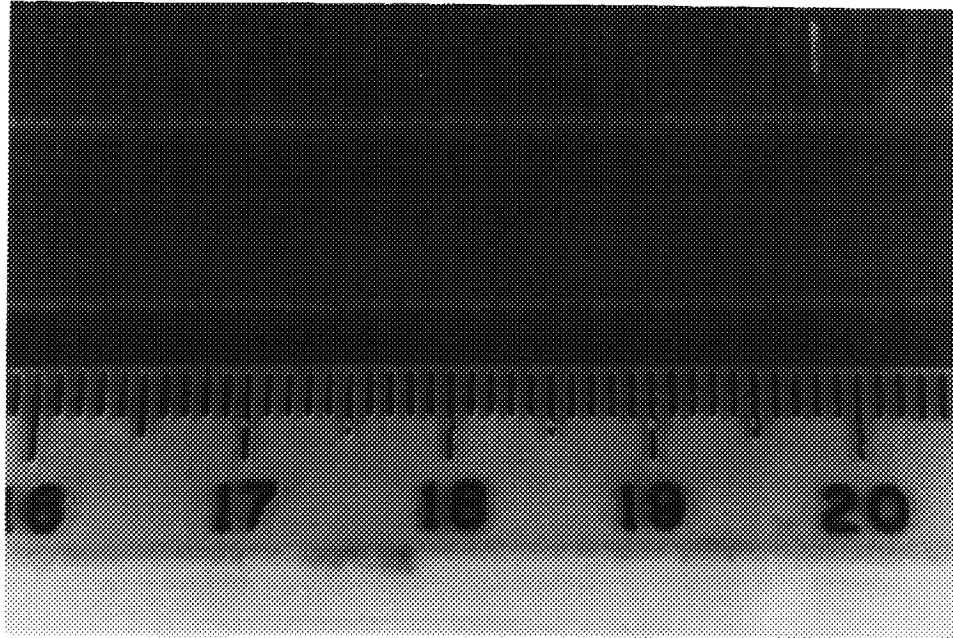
Surface of Weld 2 Made with Cup 2.
